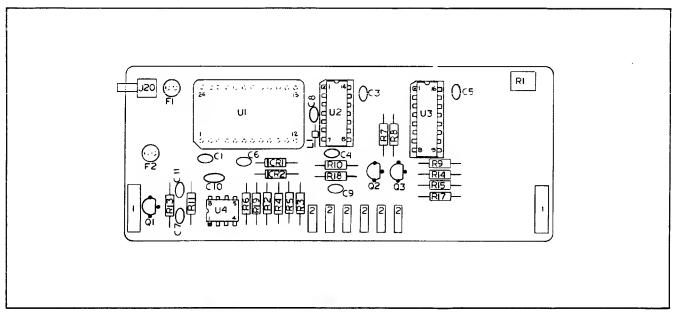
A15 1250 MHz Prescaler PCB Assembly
